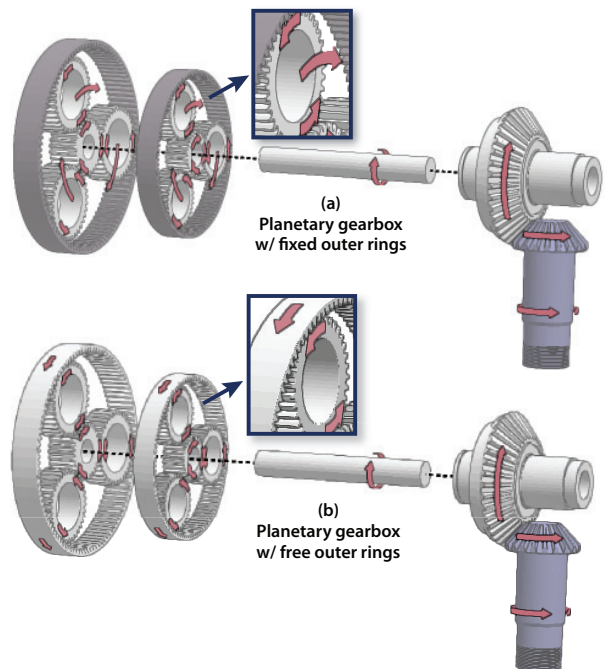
Exploded view results. Our system automatically generates exploded views that separate the assembly at co-axial junctions to reduce occlusions. These two illustrations show two different configurations for the planetary gearbox: one with fixed outer rings (a), and one with free outer rings (b). The driver part is shown in blue, and fixed parts are shown in dark grey.
